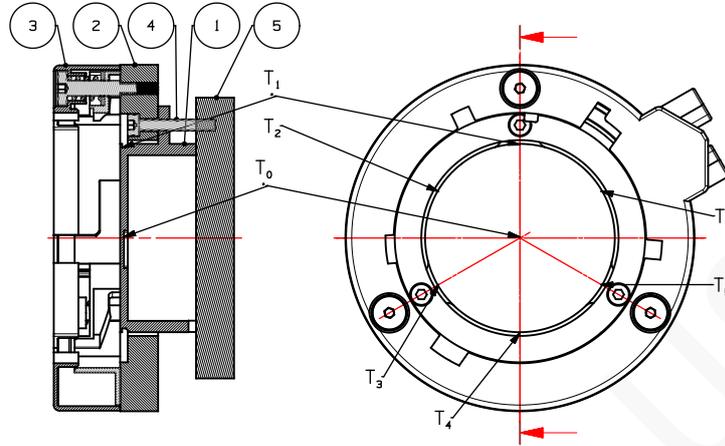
Definition of Test Fixture TUTF-PHJ65d-x — composition
